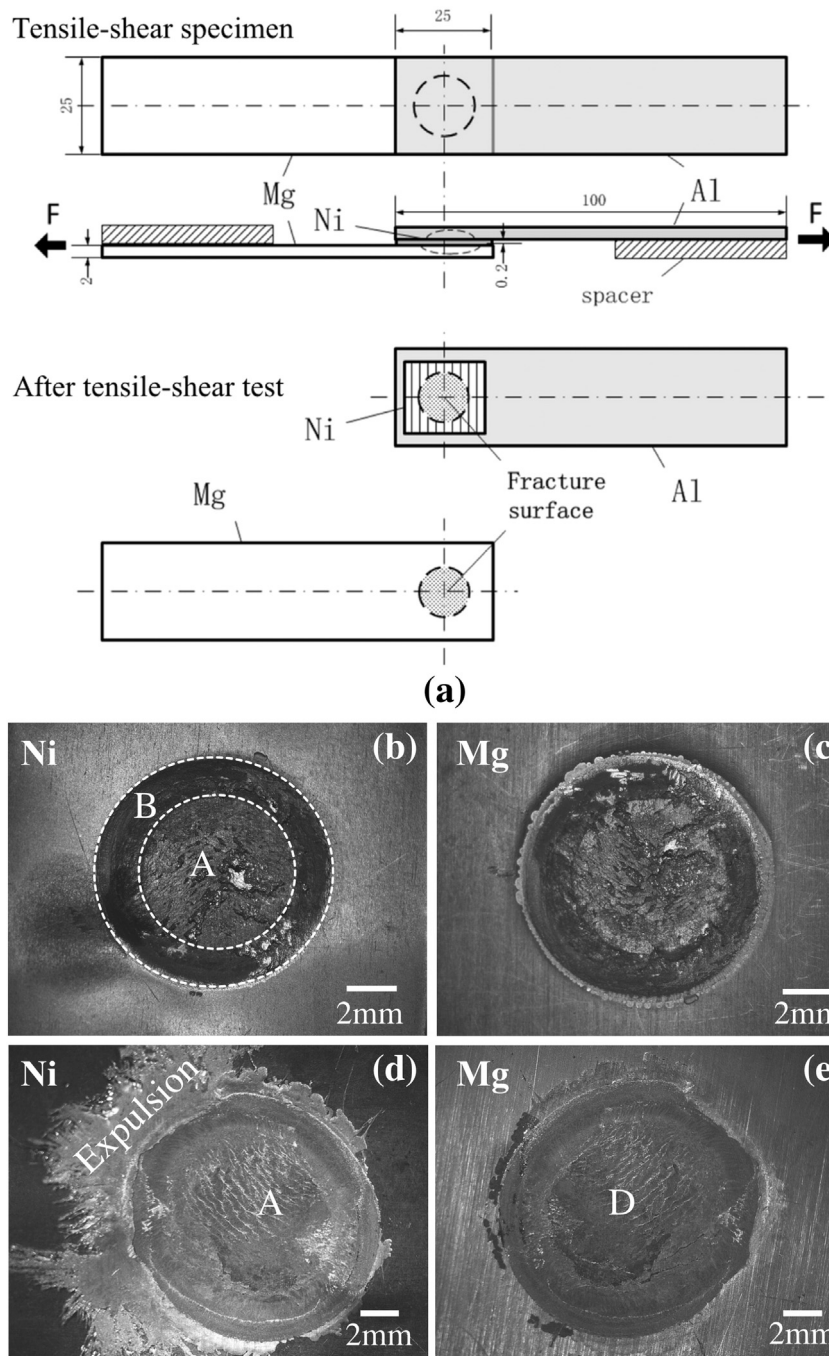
(a) schematic of tensile shear specimen and fracture surfaces; fracture surface of nugget on Ni (Al) and Mg side at welding current of 32 kA ((b) and (c)) and 42 kA ((d) and (e)).
